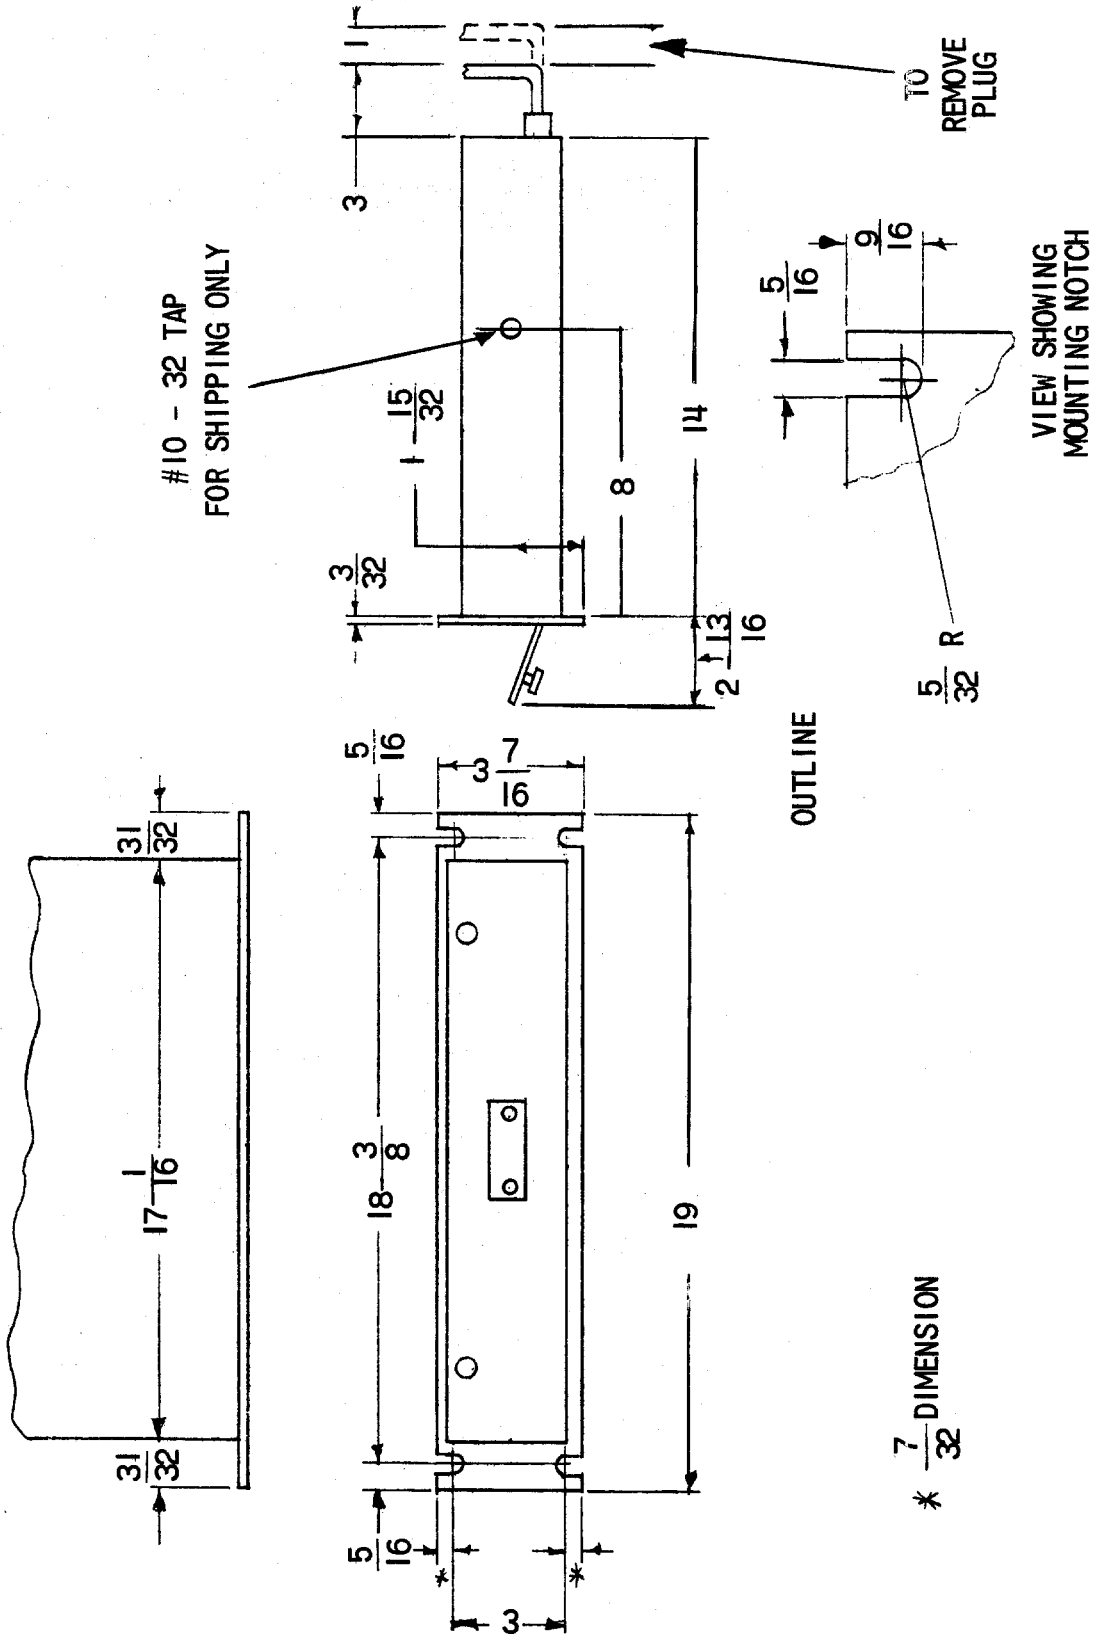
(0227A2036-0) Outline and Mounting Dimensions
